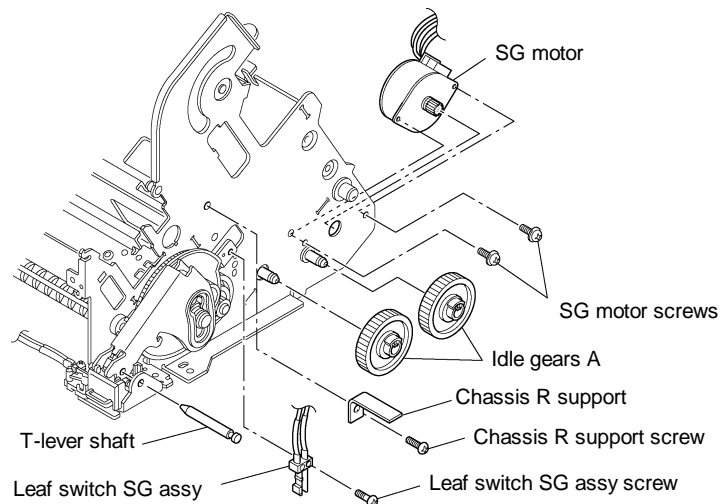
Removing the Right Side of the Chassis 1
